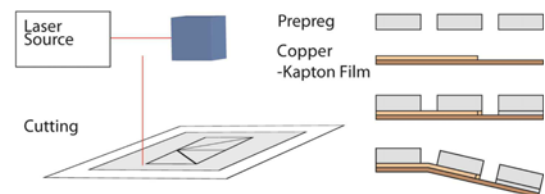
Schematic diagram of fabrication of composite composed of a segmented rigid part with flexible base part²⁸
